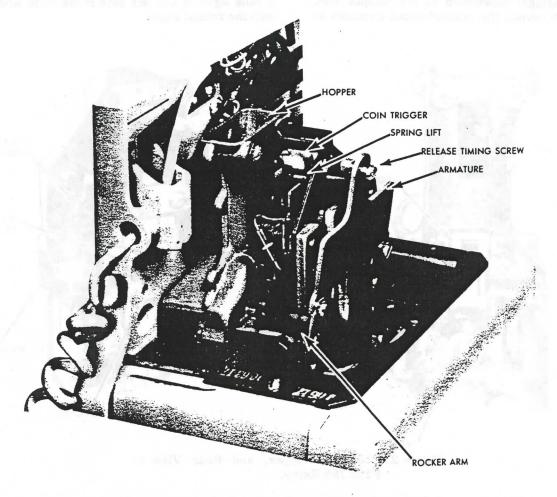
Single-Coil Coin Relay, Shown Installed, With Cover Removed.
